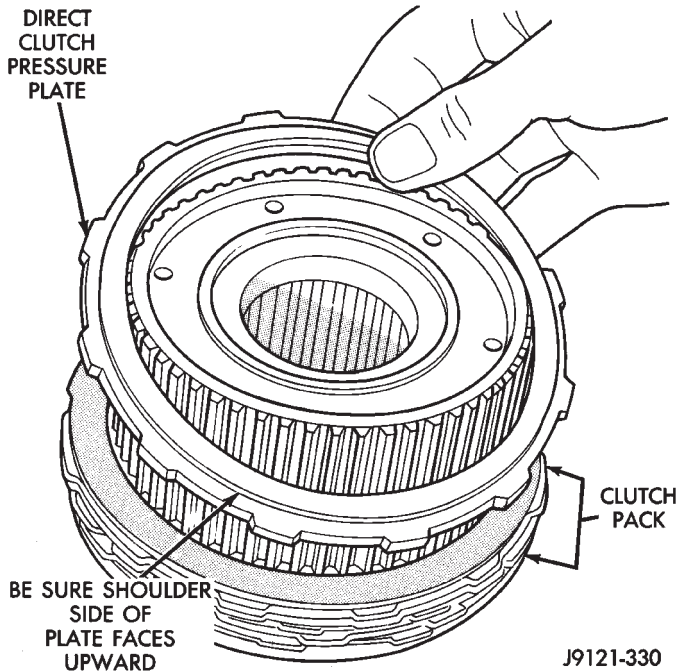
Correct Position Of Direct Clutch Pressure Plate
